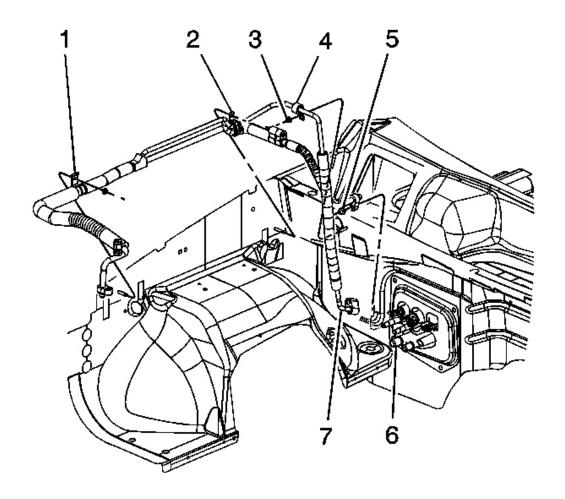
Locating Evaporator Tube (Long Wheel Base) Courtesy of GENERAL MOTORS CORP.
